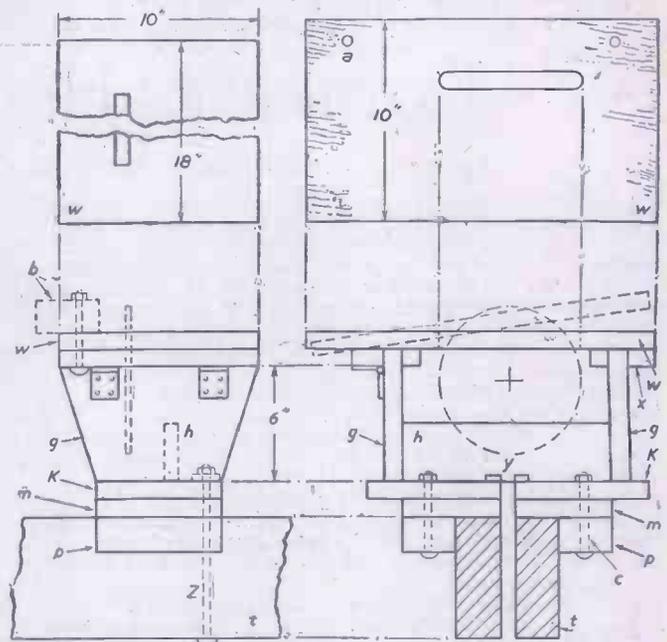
Details of the hinged cutting table and method of fixing to the lathe bed.
